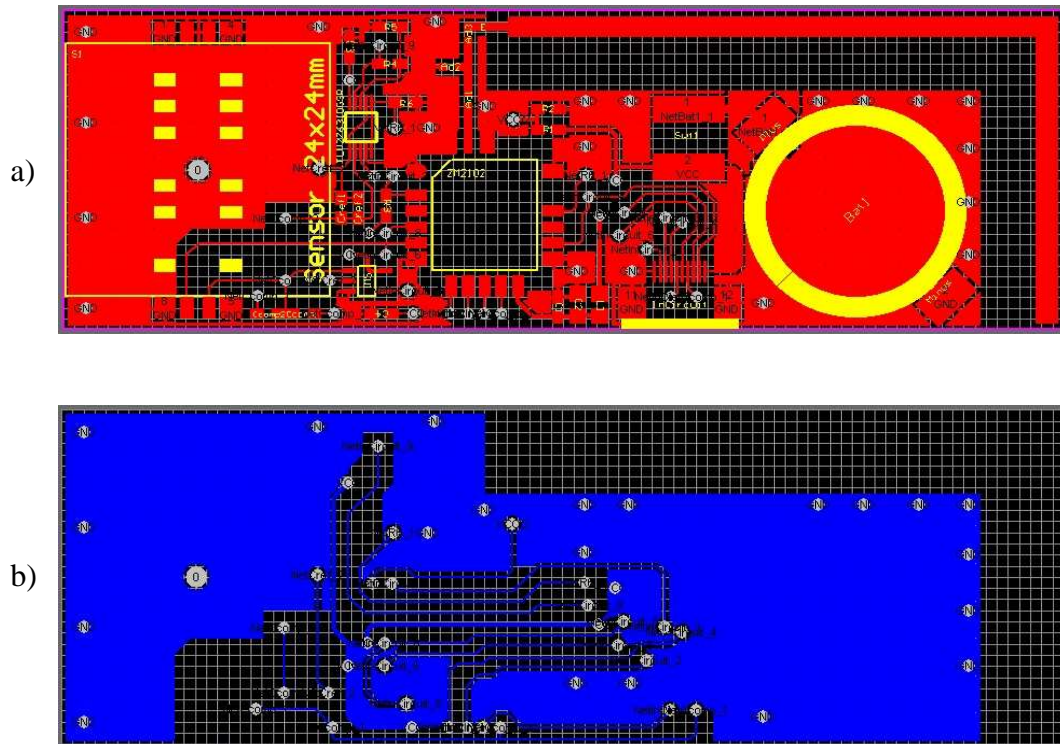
wireless sensor node layout : a) top view b) bottom view
